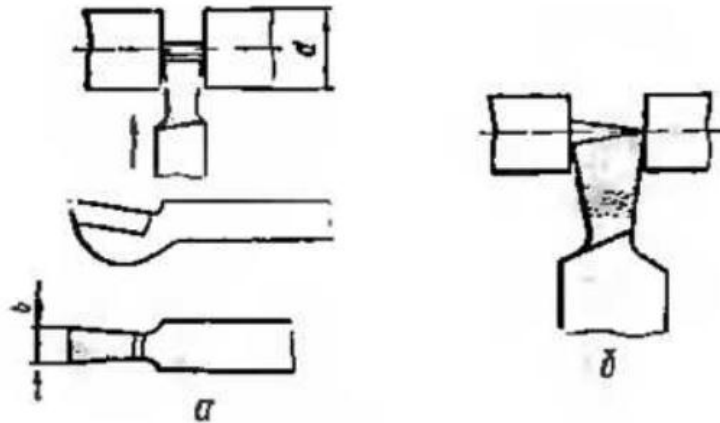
Cutting cutters: a – with a straight cutting edge, b – with a beveled cutting edge.
